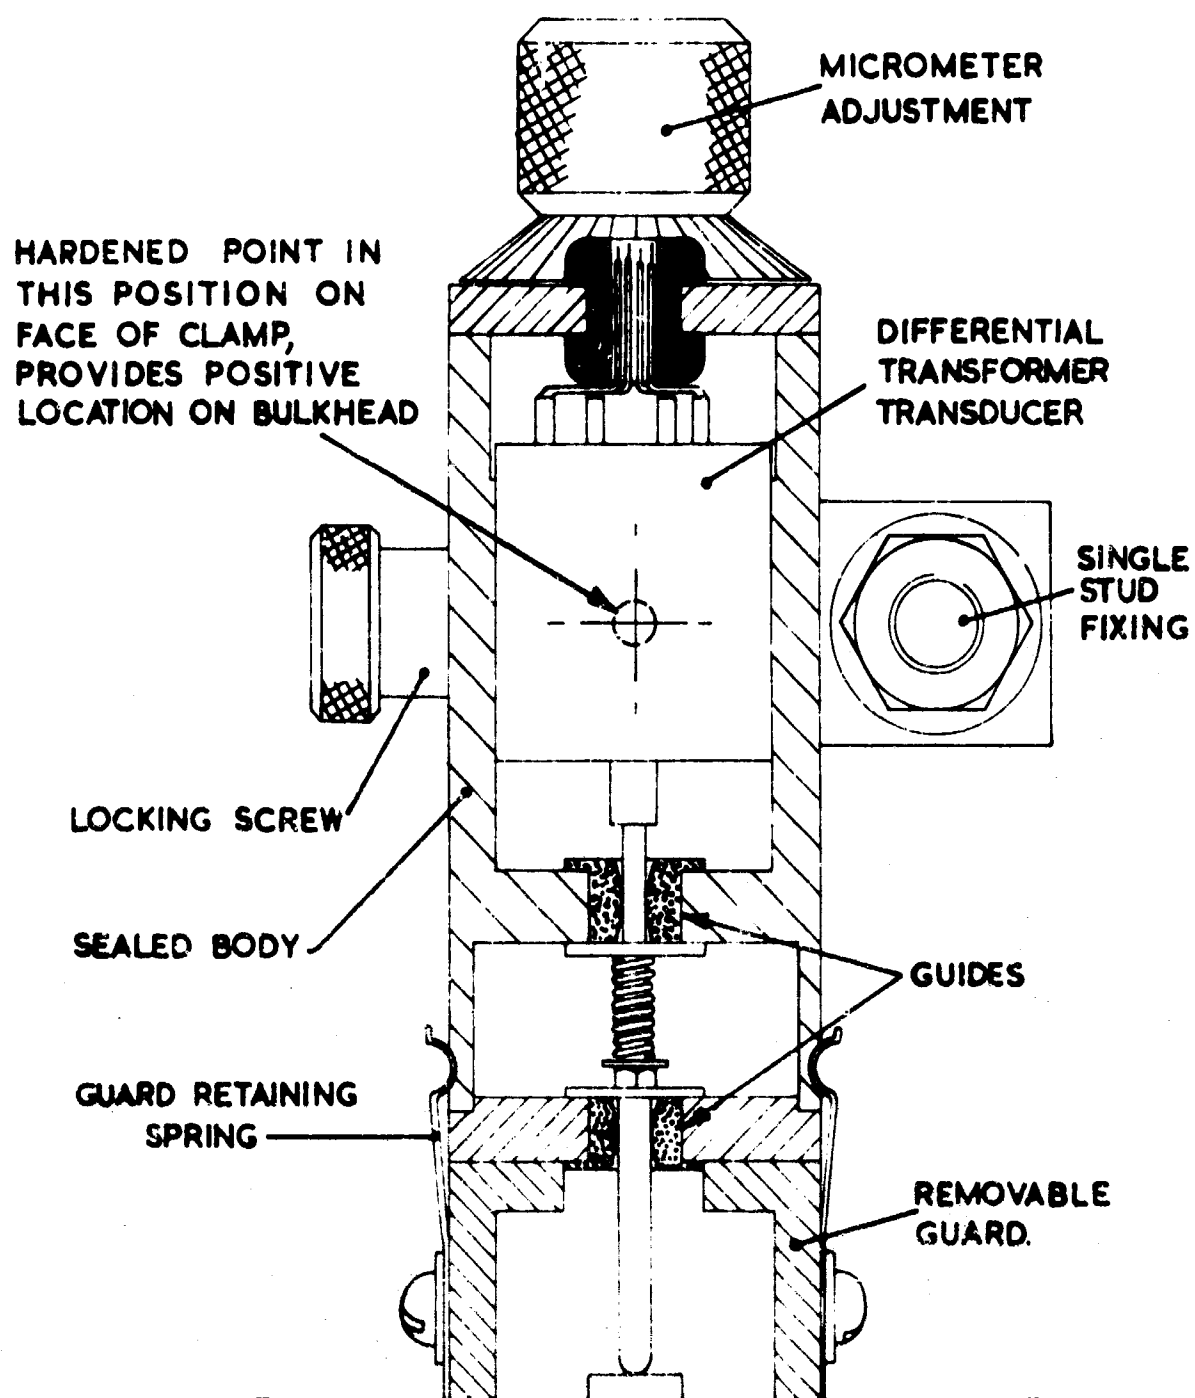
LAYOUT OF TRANSDUCER MODULE
